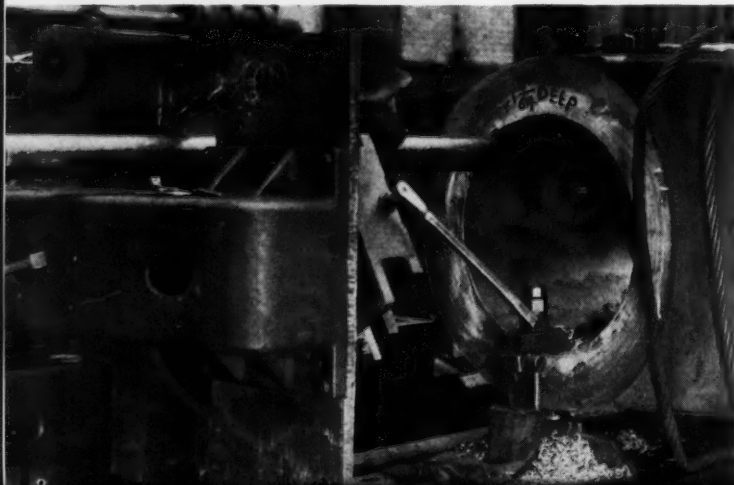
Close-up View of Tool-holding Rig in Operation, Cutting Keyway in Steel Rudder.
